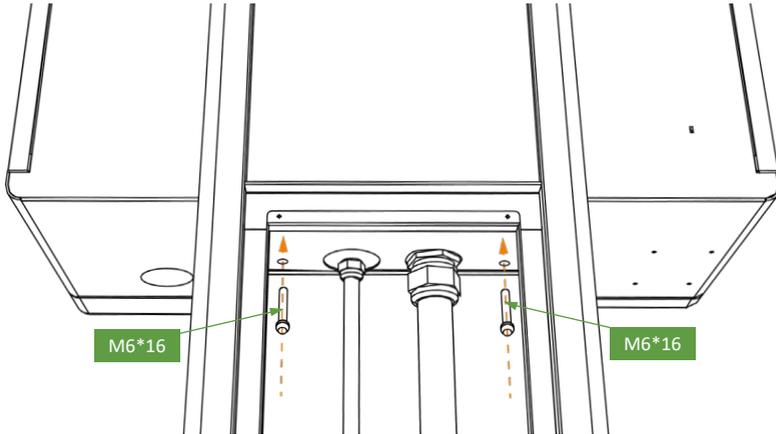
schematic diagram of mounting hole at the bottom of charging box
